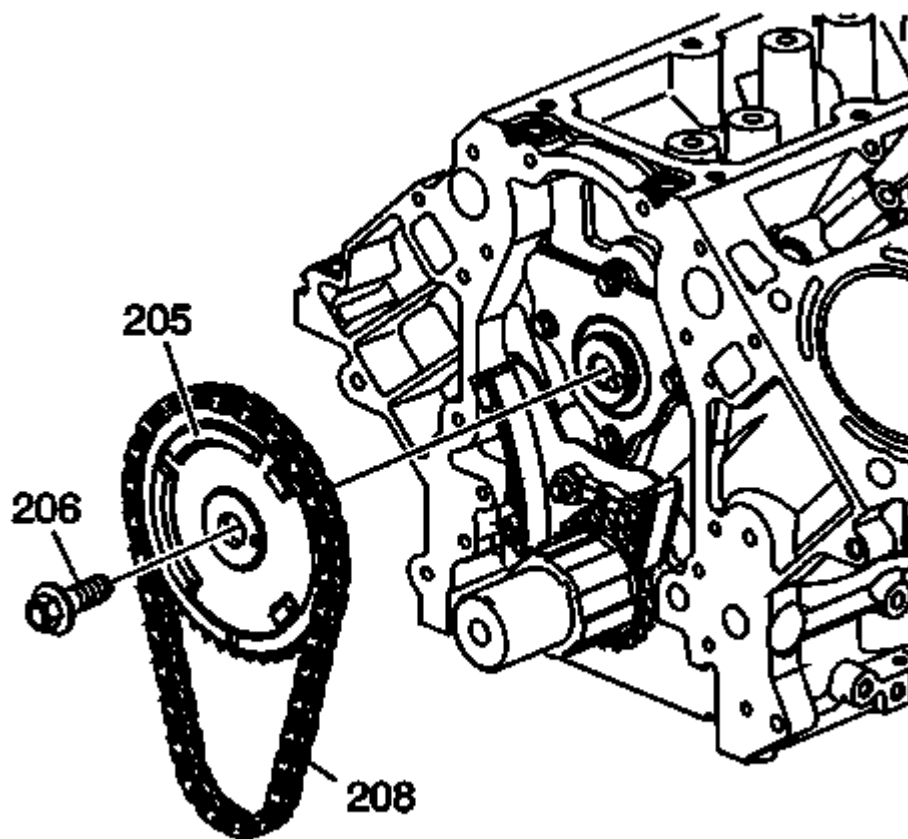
View Of Camshaft Sprocket, Timing Chain & Sprocket Bolt
